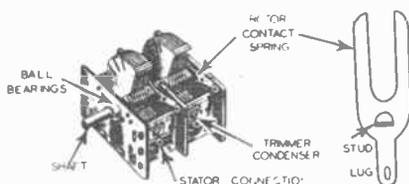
Typical two-section variable tuning condenser, with detailed sketch of a rotor contact spring. The outer rotor plates are slotted and bent for alignment purposes; do not touch these bent plates until you know more about them.
